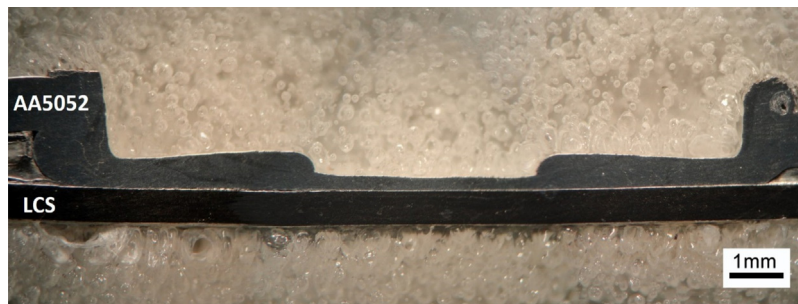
Macrographic appearance of the weld 55-A.
